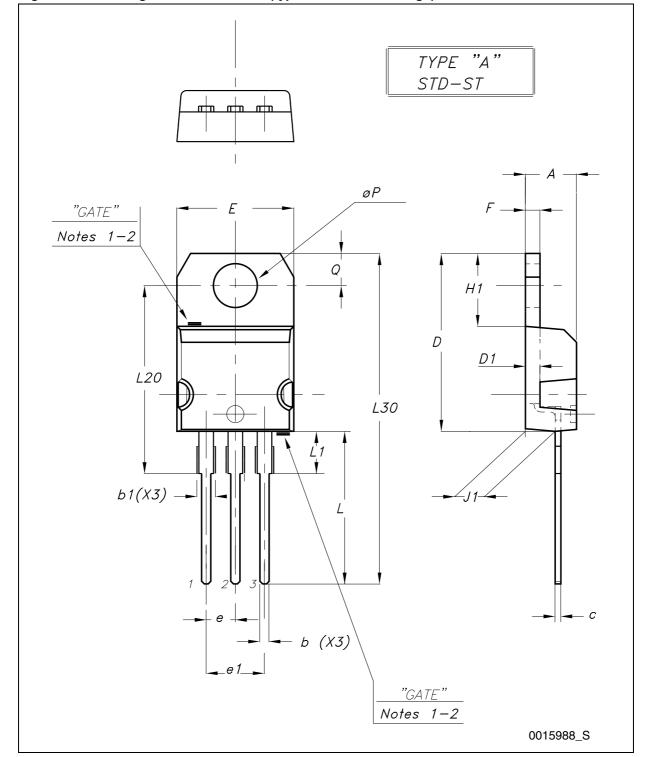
Drawing dimension TO-220 (type STD-ST Dual Gauge)
